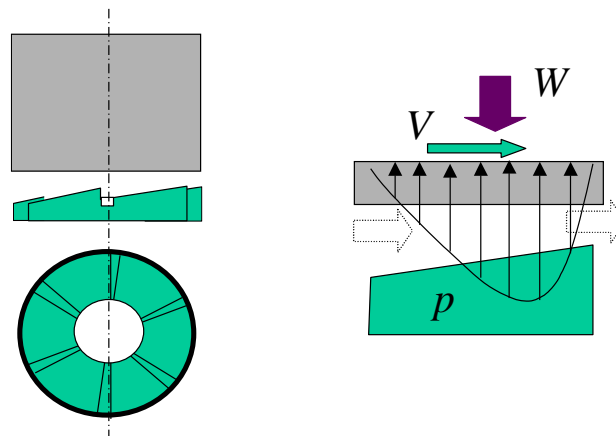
Slider bearing. Left: pad configuration, right: performance of each pad.
